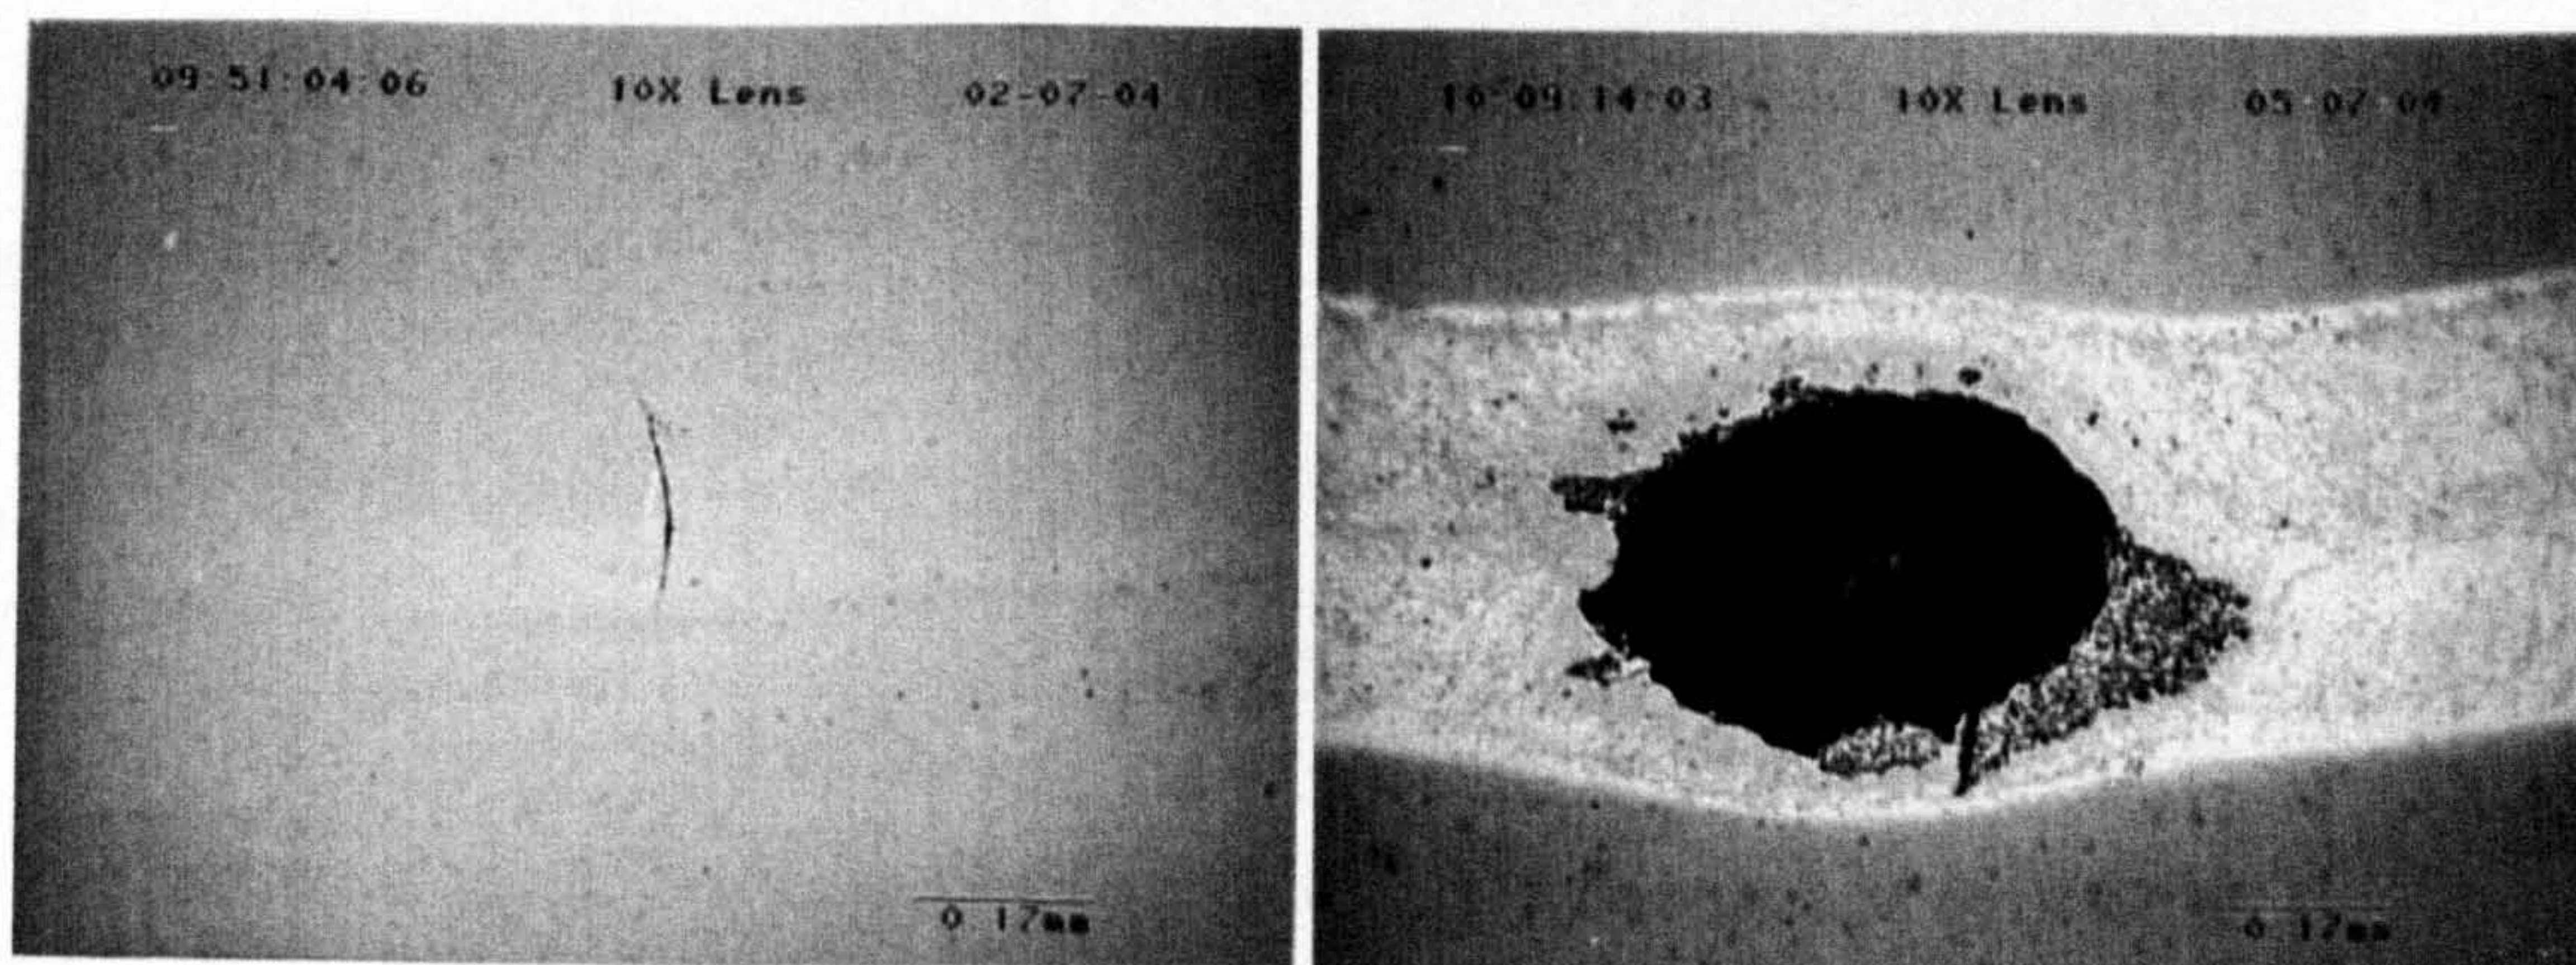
(a) shows the surface ring crack after 241 hours of testing (Test TT9-2). The contact track is seen clearly and the crack gap is getting bigger. No other surface damage is observed. The overview of the fatigue spall is shown in figure 4.27(b). Observations from Test TT9-3 are shown in figure 4.28. Figure 4.28(a) shows the ring crack image after 55 hours of testing (Test TT9-3). The crack is clearly seen under a normal light source. Spalling fatigue failure occurred after 106.42 hours of testing shown in figure 4.28(b).
